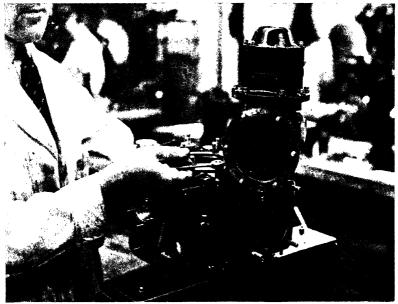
Tightening auxiliary drive casing in position on rear cover.
